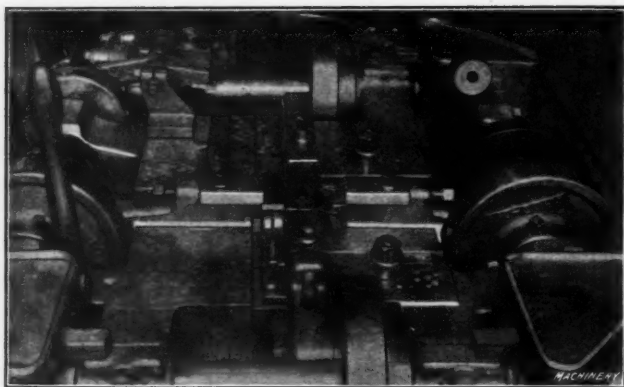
Flat Bed and Four Slides of a Wire-forming Machine
